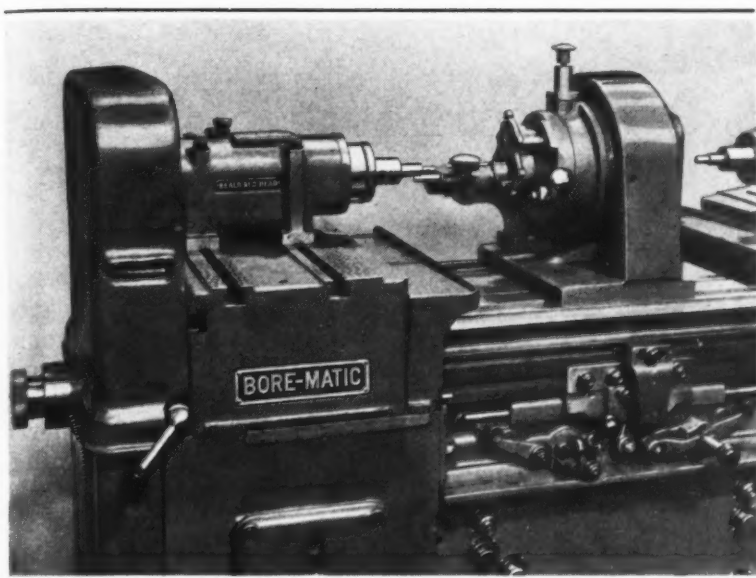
Double-end Bore-Matic Equipped with Indexing Fixture
